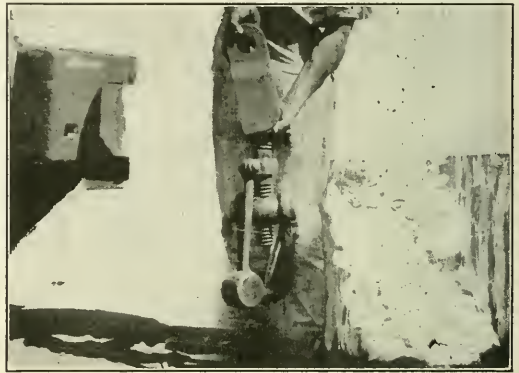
Modified Screw Coupling Ready to be Mounted in Coupler Head
